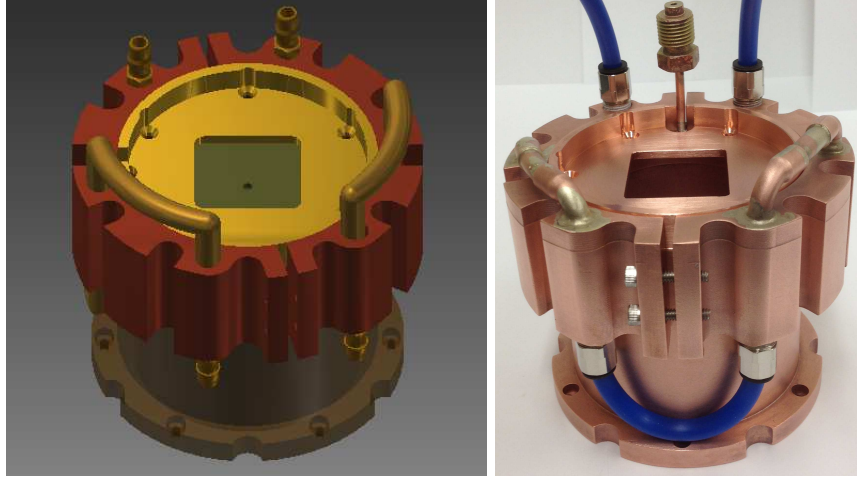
(Left) A 3D mock-up of the new ECR ion source plasma chamber heat sink was designed with Autodesk Inventor. This drawing shows the assembly of the plasma chamber (brown), the new copper mount for the RF/vacuum window (gold), the boron nitride window (green), and the new copper heat sink collar (red). (Right) A photo of the machined and assembled ECR ion source plasma chamber heat sink.
